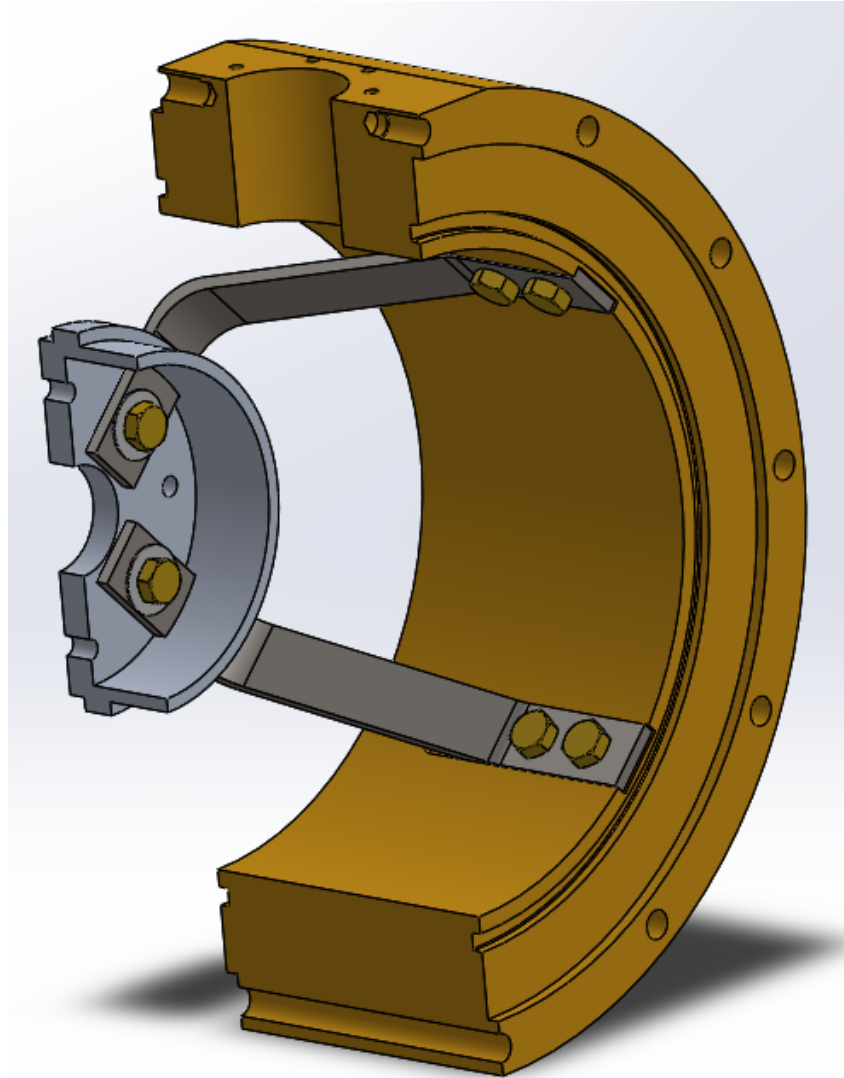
Section view of the end cap, ties, and injector flange prior to installation on the Ludwig tube.
